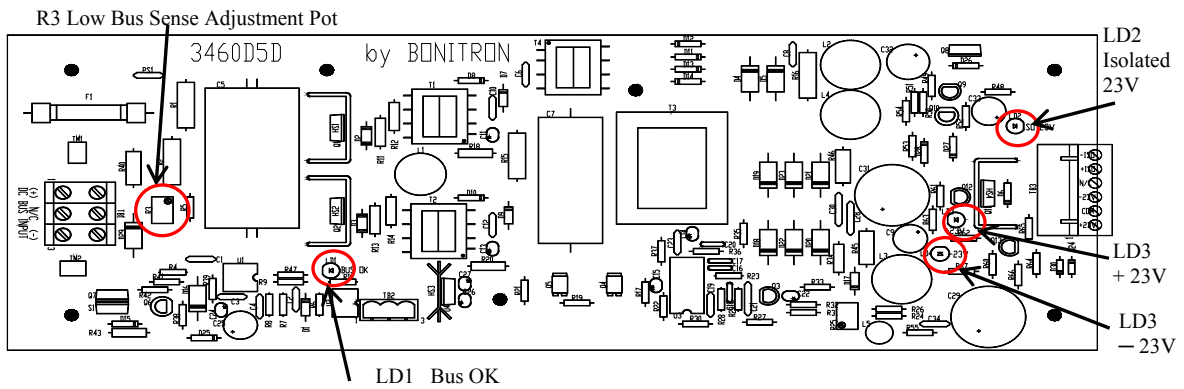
Ride-Thru Module 3460D5 Power Supply Board Layout
